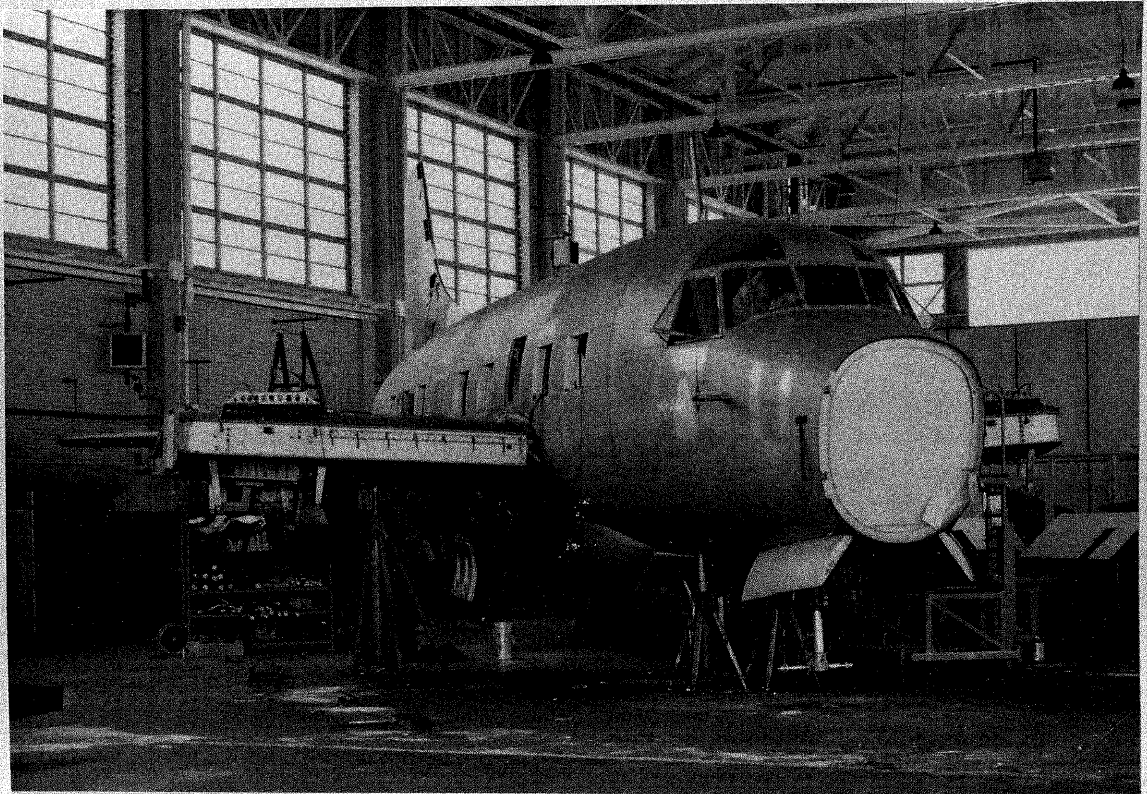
CENTRE SECTION FITTED WITH MOD. 516
